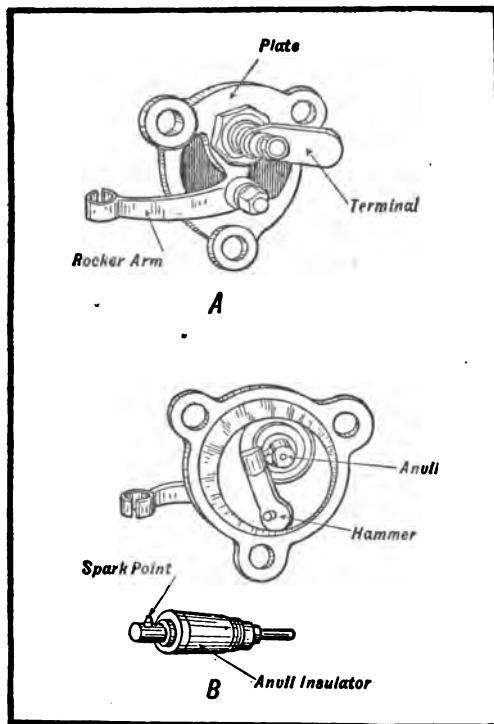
Construction of Locomobile Low Tension Igniter Plate.
